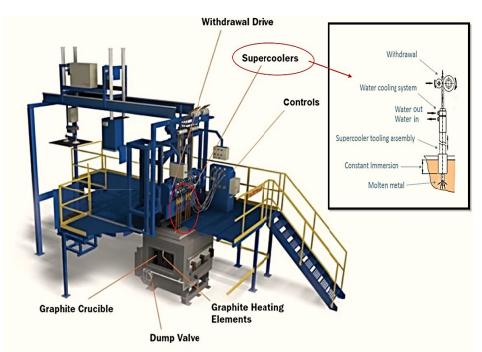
Schematic of continuous Rod casting machine. Rautomead sells between 5 and 10 machines per year [E1]. Image courtesy of Rautomead.
